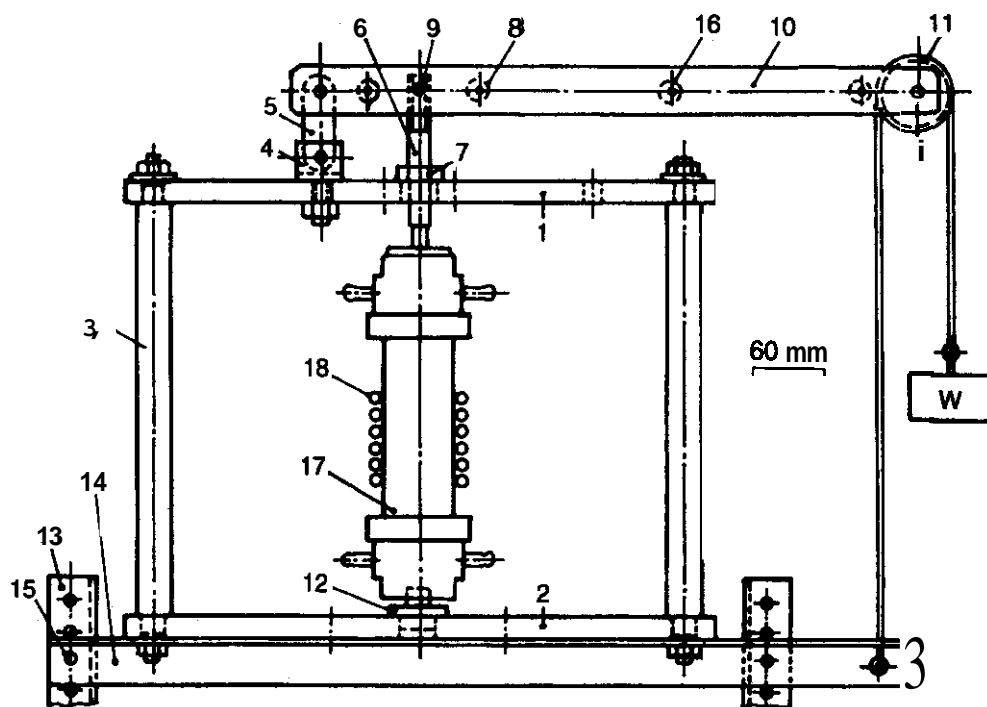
Schematic of the uniaxial hot press: (1) and (2) MS plates, (3) supporting rods, (4) bracket, (5) linkage, (6) piston rod, (7) gun metal bush, (8) spacers, (9) shear pin, (10) lever arm, (11) pulley, (12) pressure pad, (13) rigid support, (14) movable platform, (15) supporting bolts, (16) spacer bolts, (17) hot press module, (18) RF induction coil, (W) dead weight.
